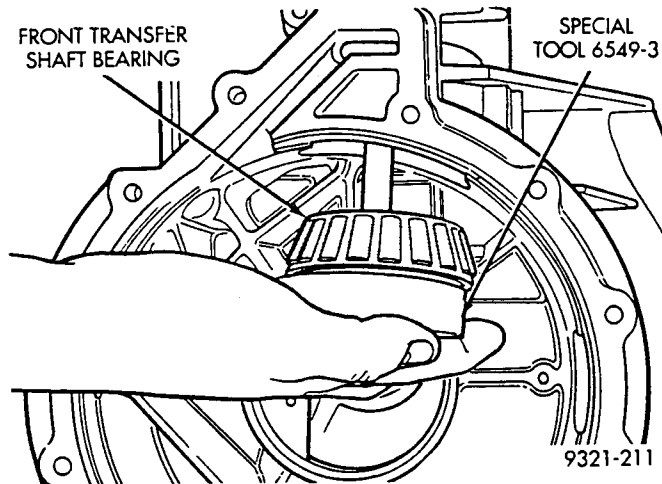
Installing Gauge Disc with Front Transfer Shaft Bearing
